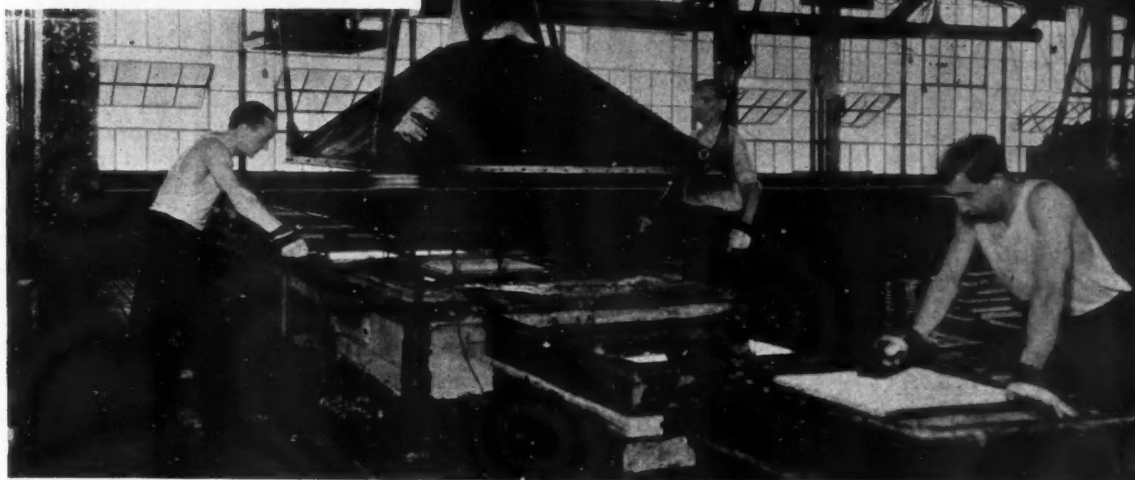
Dipping faces of radiator cores into molten lead bath to solder seams. Gas-fired furnaces employed
